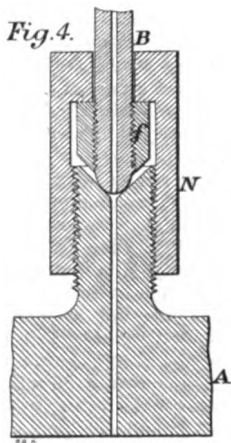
DETAIL DRAWING OF STEEL TUBE-CONNECTION FOR VERY HIGH PRESSURES.
